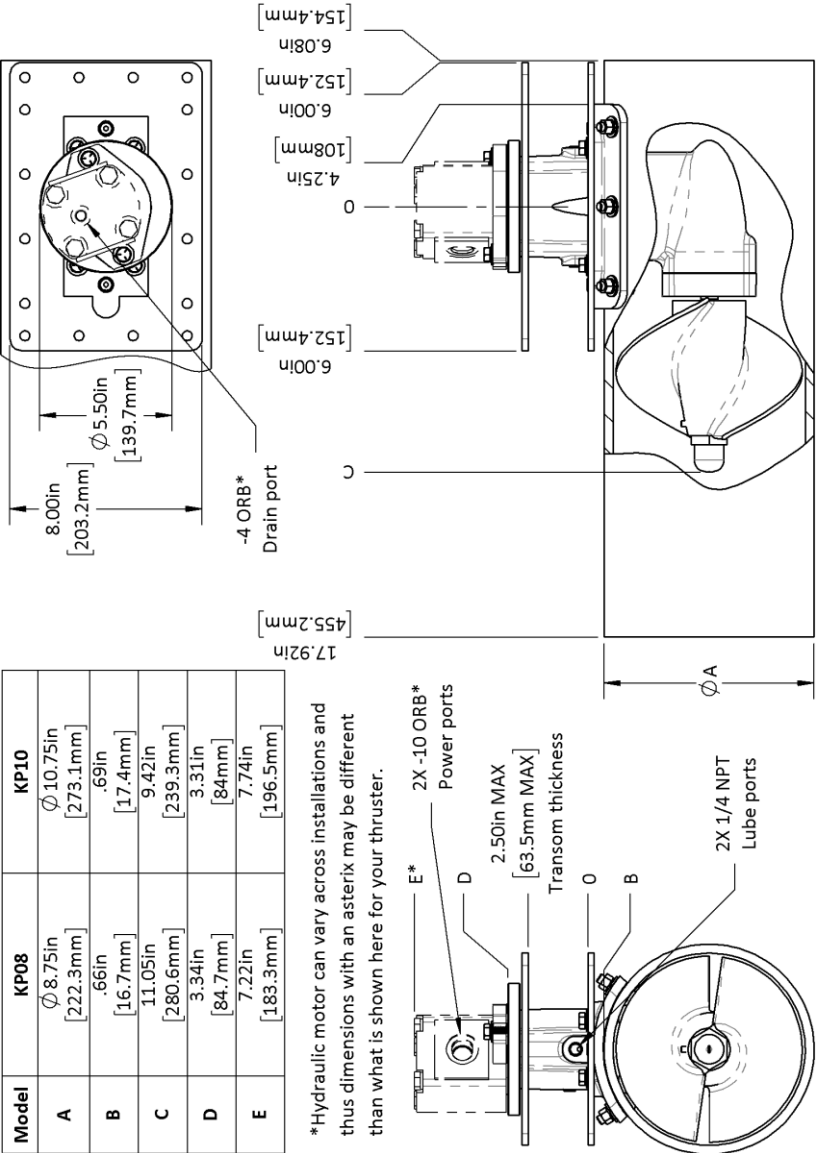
Transom mounted KP08 & KP10 Hydraulic Thrusters' dimensions
